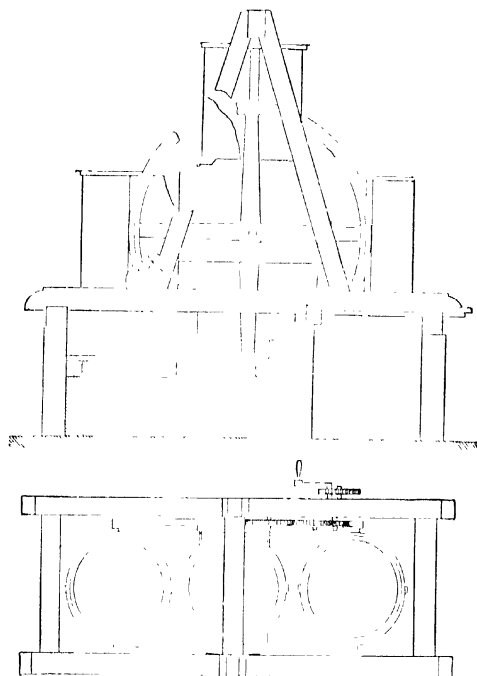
Fisher Wool Steeping Tank, Showing Elevation and Plan.
